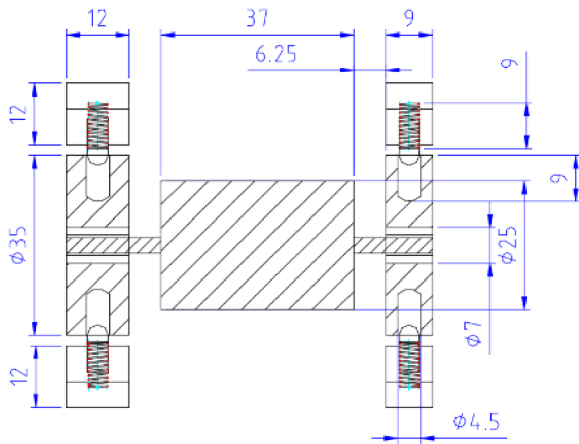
The dimension of mini crawler assembly (all in mm).
